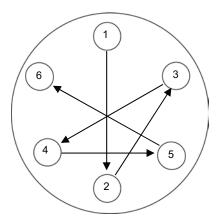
Second Stage Valve Head Cap Screw Torque Sequence.
